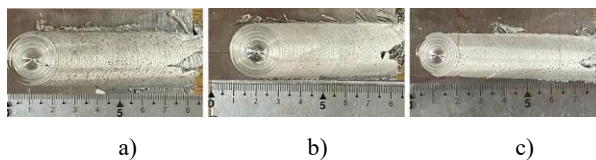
The top-view images of the welds made with Tool 3 are as follows: a) 80 mm/min; b) 125 mm/min; c) 150 mm/min
